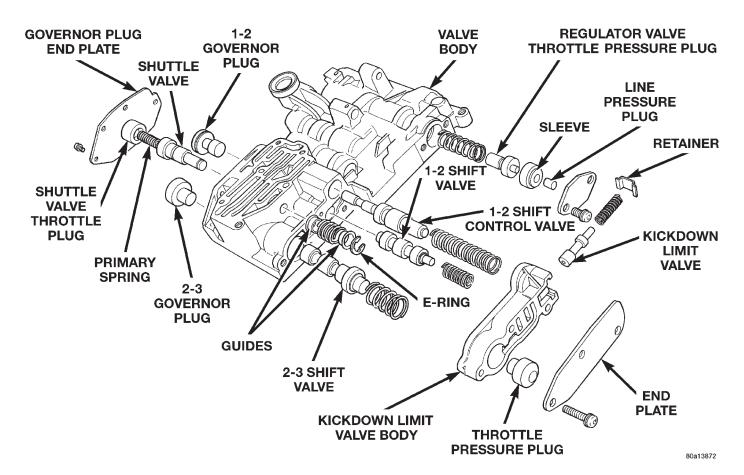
Control Valves, Shift Valves, And Governor Plugs
